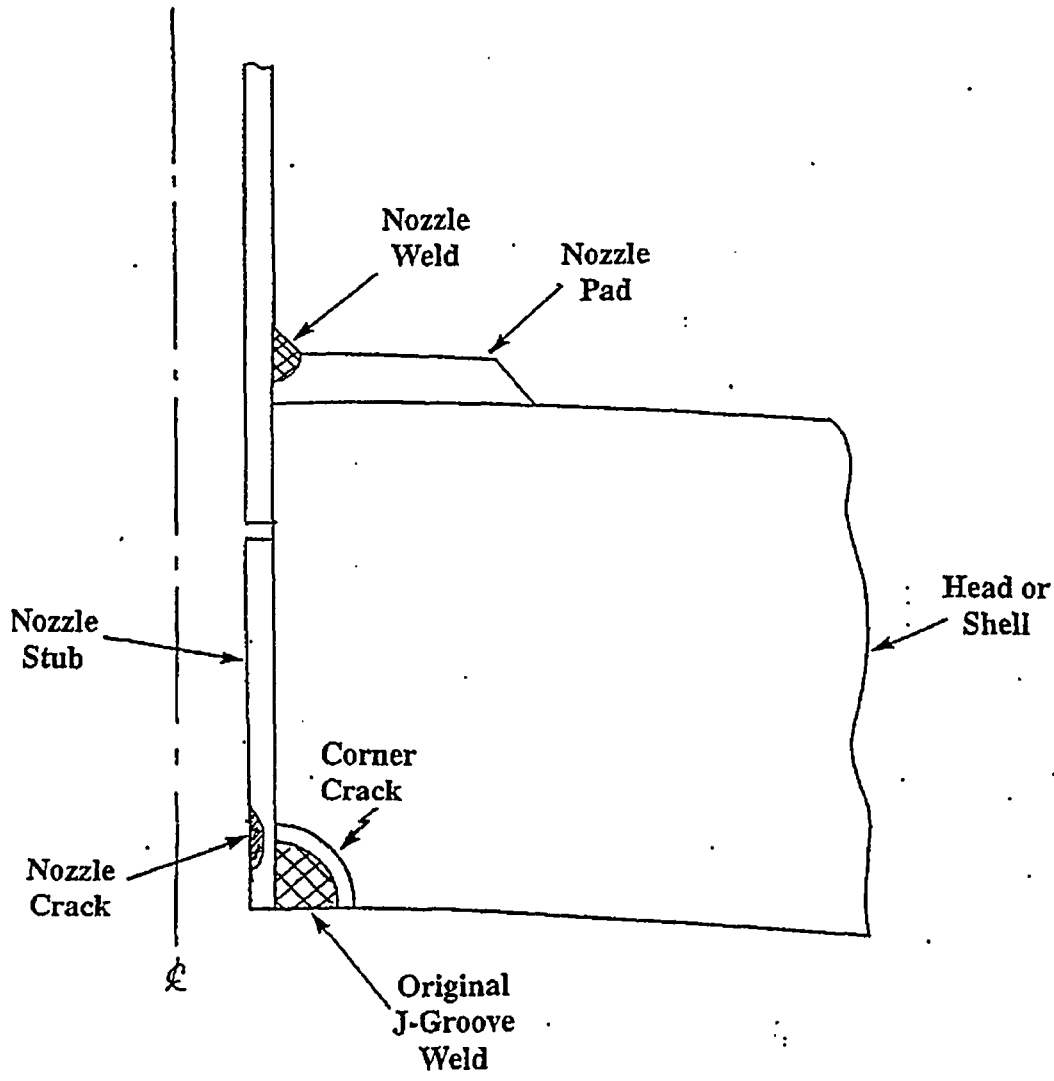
Postulated Flaw in Nozzle Stub Weld Region.
